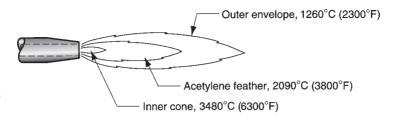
A typical oxyacetylene welding operation (OAW).
